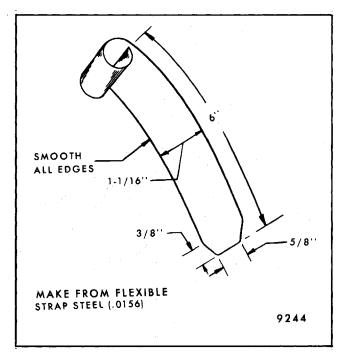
Head Restraint Antiremoval Lock Releasing Tool - 1977 B and C Body Styles amd 1978 A, B and C Styles
